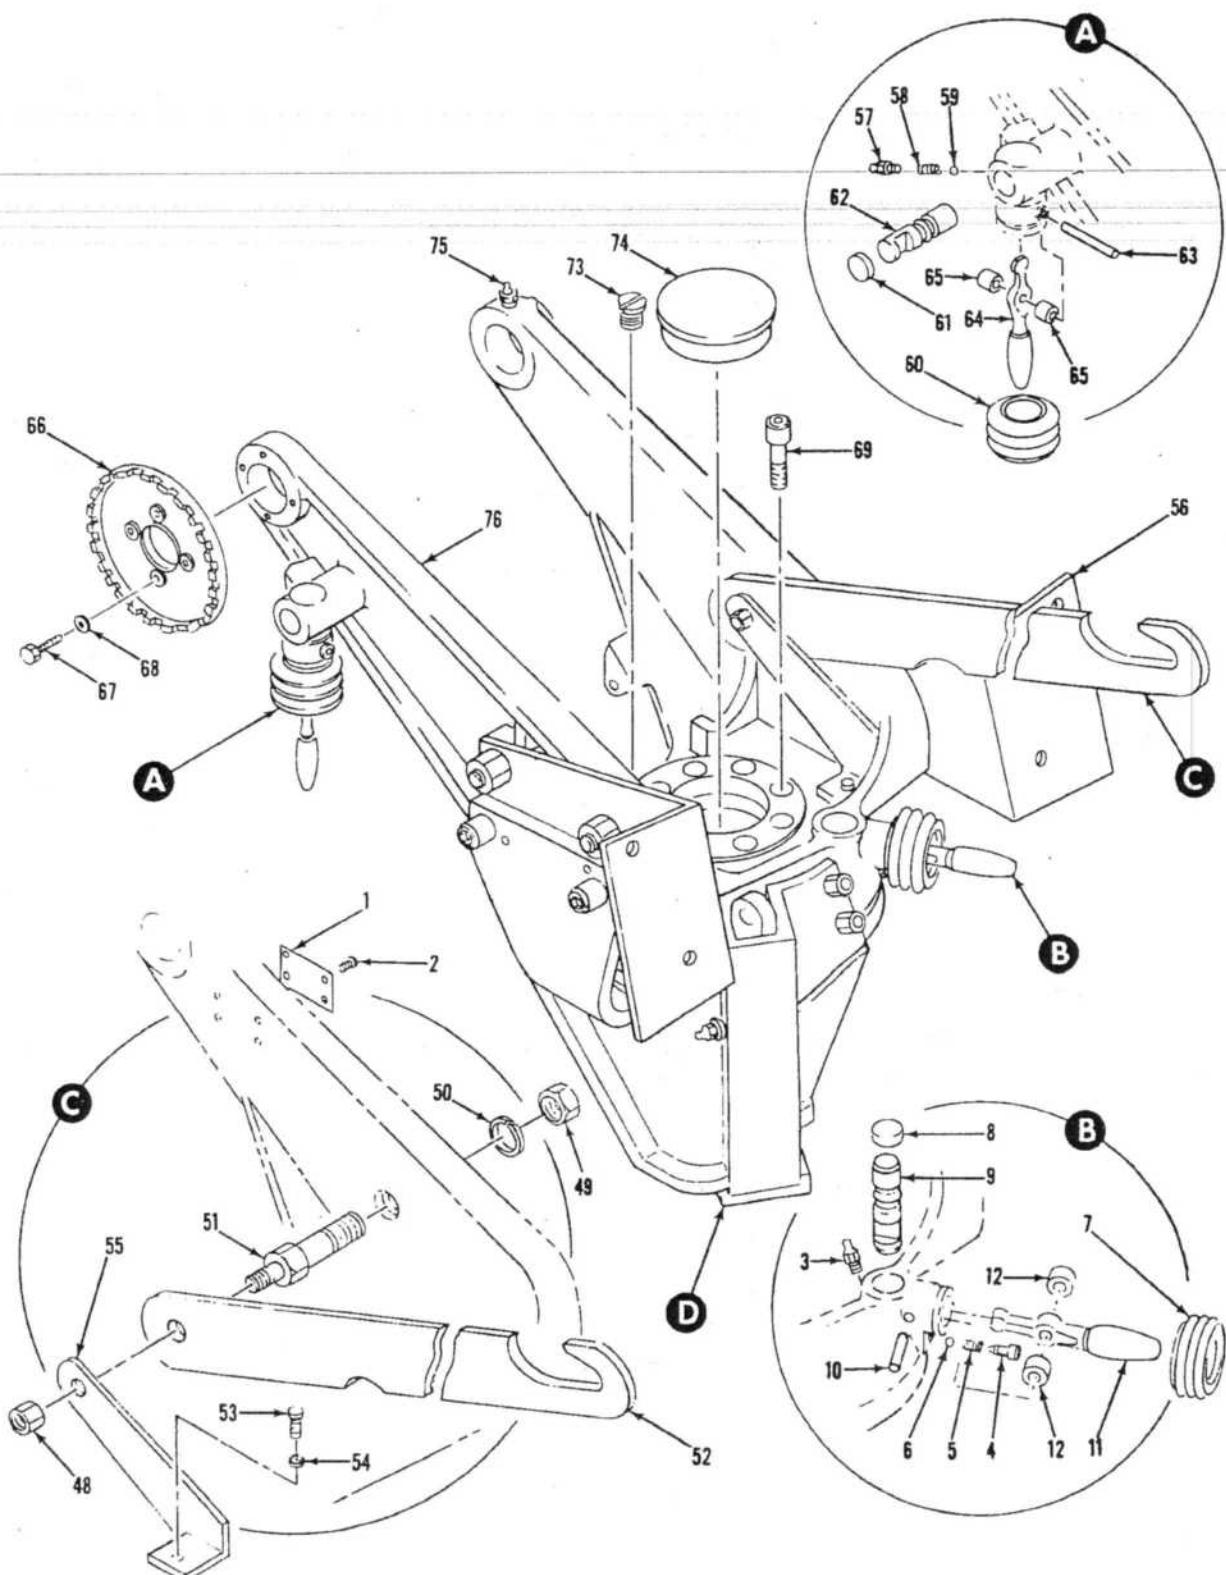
20 MM Carriage (MK 7 MOD 0, 1 and 4) (Sheet 1 of 2)
